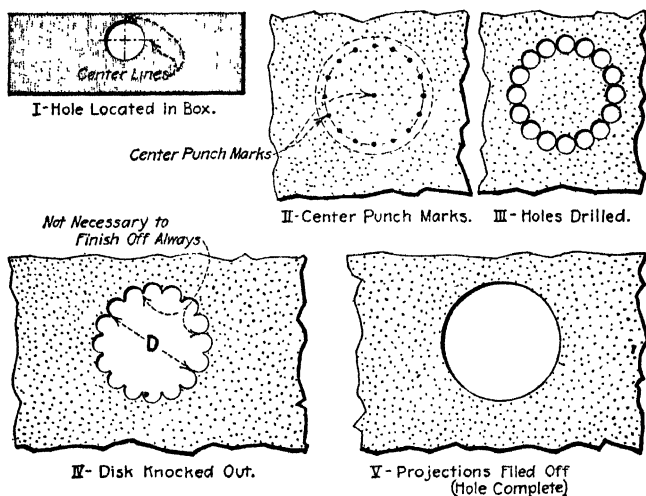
Showing how to make a large hole in a steel box by drilling smaller holes therein.
